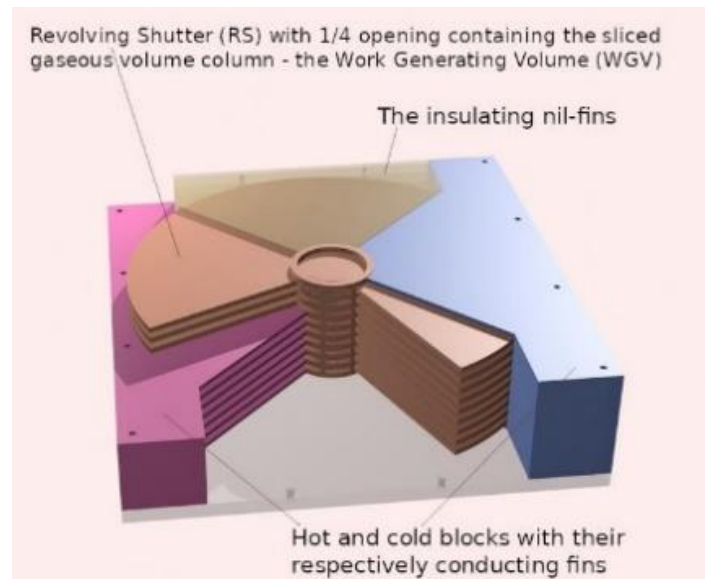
Cut out of GREC, Shows the engines layered design making it scalable. [2]
